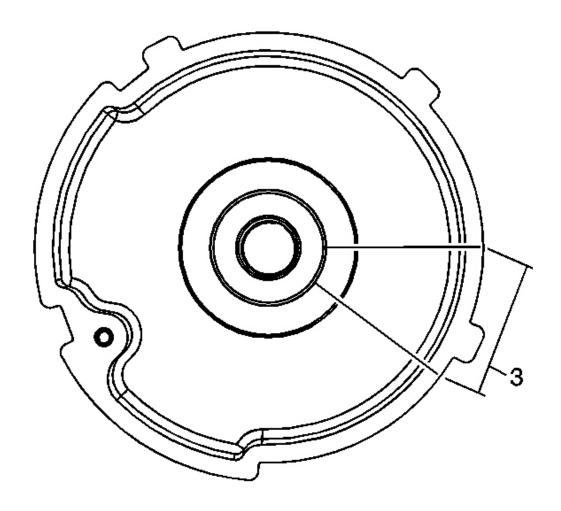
Measure Distance Between The Two Lines Courtesy of GENERAL MOTORS CORP.
